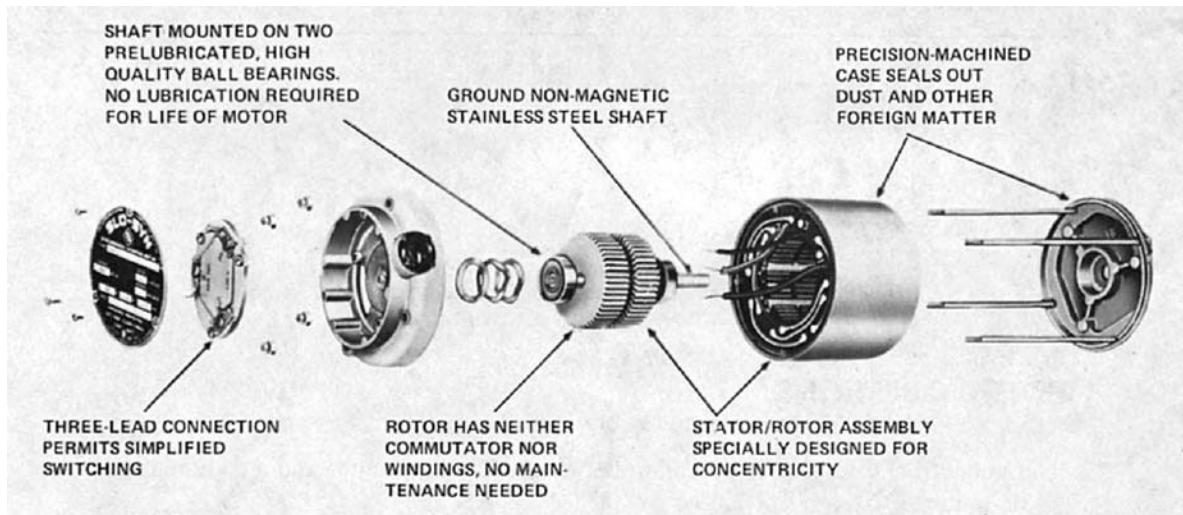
Exploded diagram of a stepping motor. (Courtesy The Superior Electric Company.)
